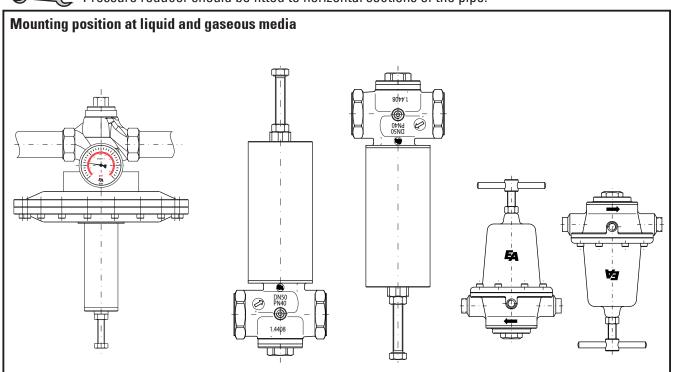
Pressure reducer, Mounting position at liquid and gaseous media
